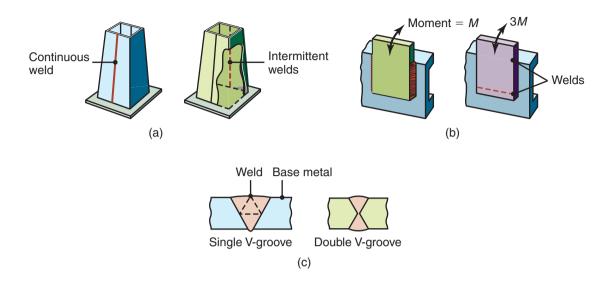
Examples of weld designs used in Example 30.3.
